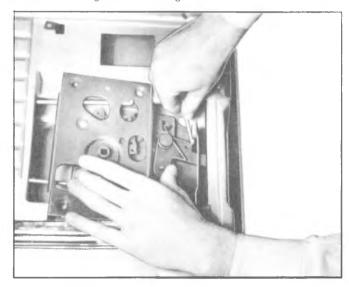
D-120--Disconnecting Lower Latch Rod from Latch
